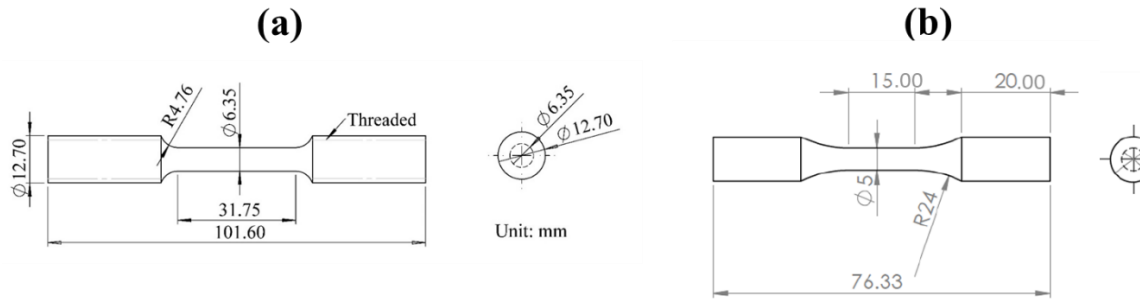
The final geometry of: (a) tensile and (b) fatigue specimens.
